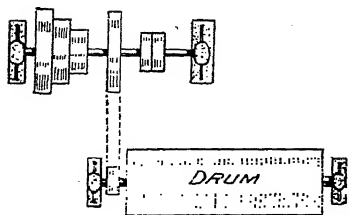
Belt driving a grinding head from a countershaft situated above the lathe.
